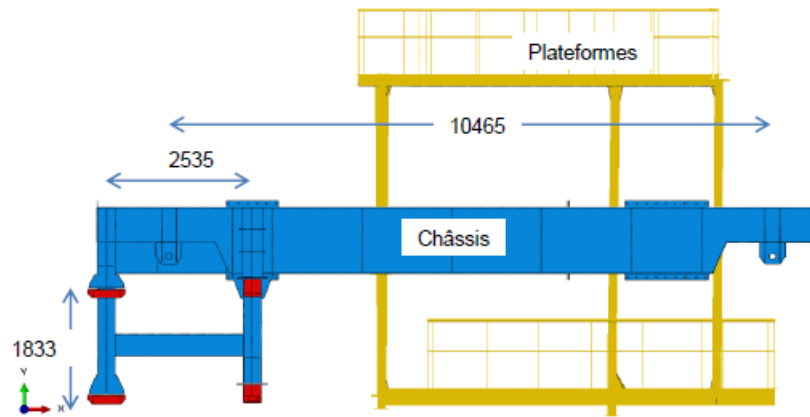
Carriage structure-elevation (source: Drever calculation sheets)
